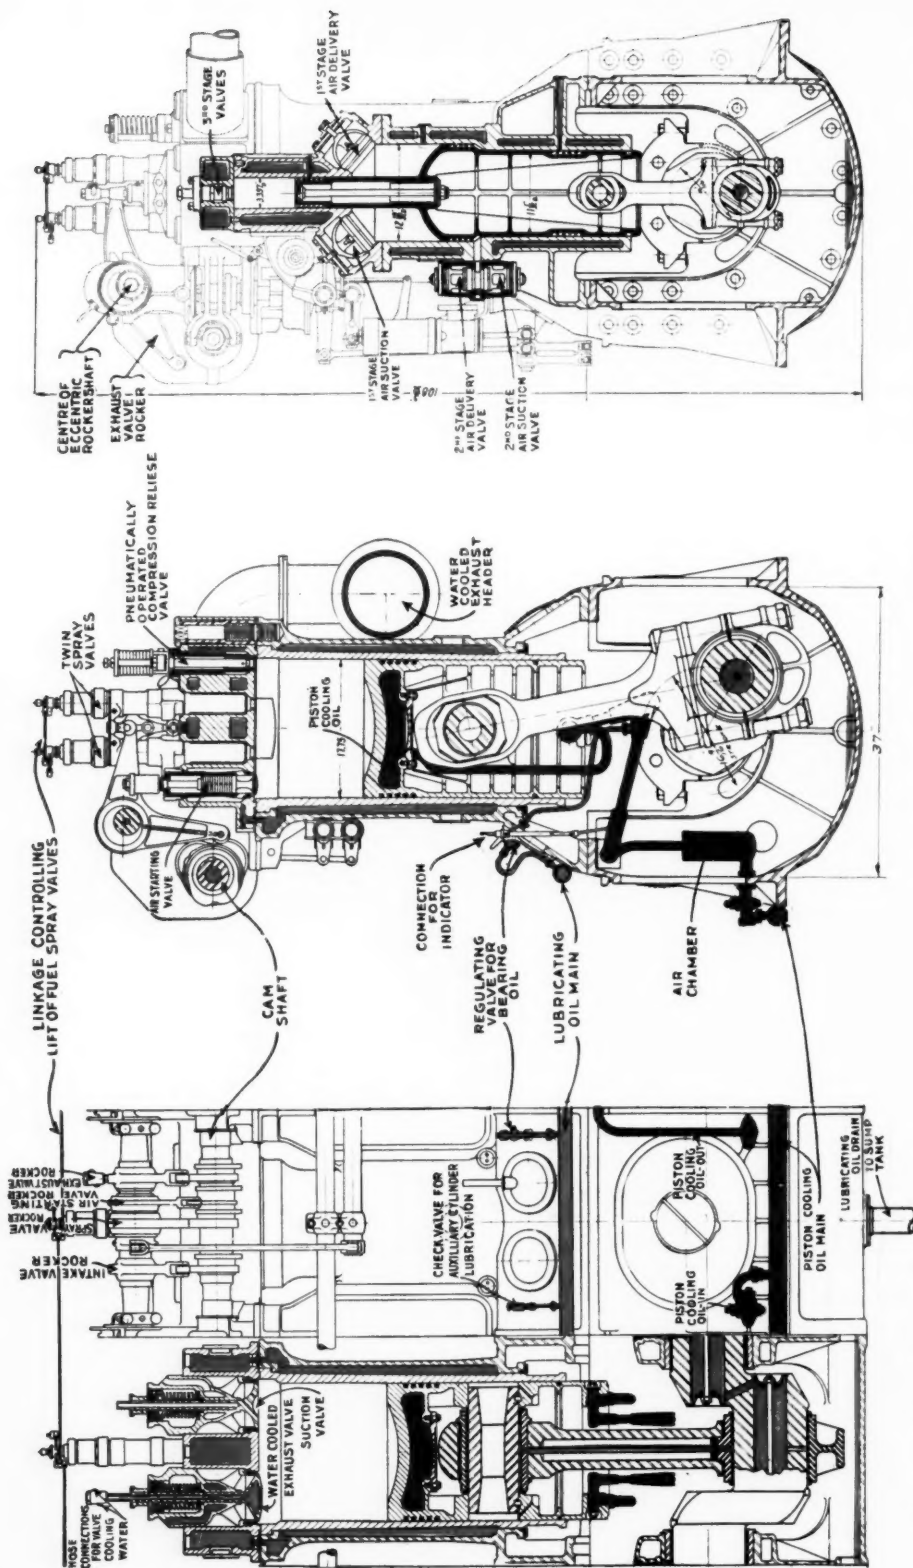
Longitudinal Section and Elevation of 2 Main Cylinders.
